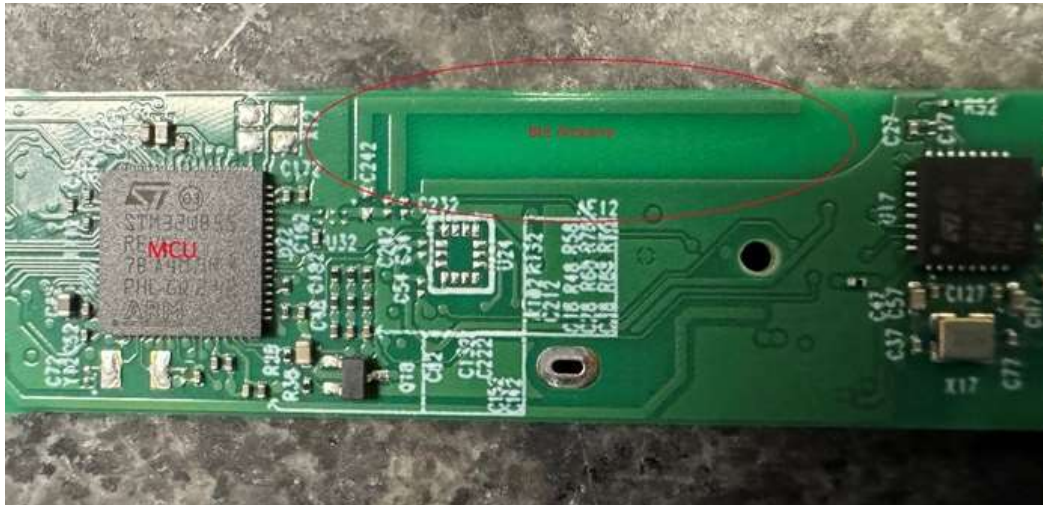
The MCU and BLE antenna are located on the bottom side of the PCB.
